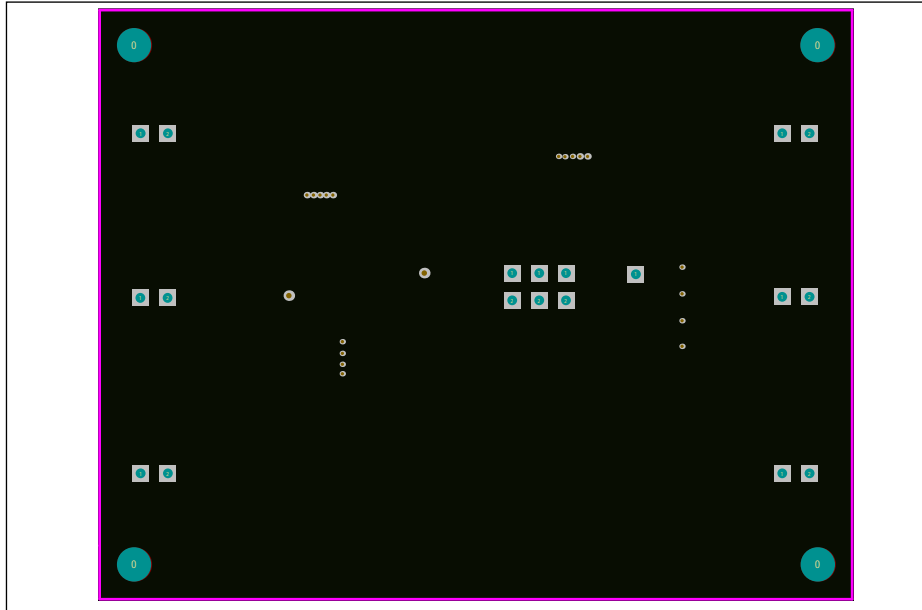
Board Component Placement Guide - Bottom Layer (SOT23-6)
